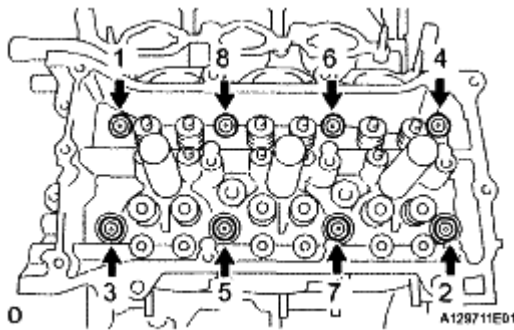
Removing Cylinder Head Bolts And Plate Washers In Sequence
